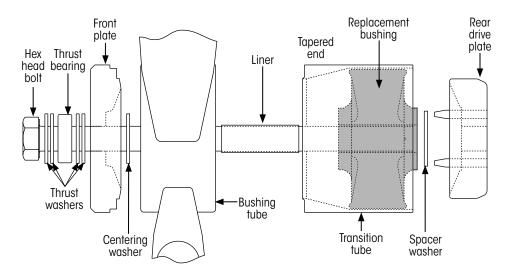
Assembling narrow bushing tool for QFI bushing installation
